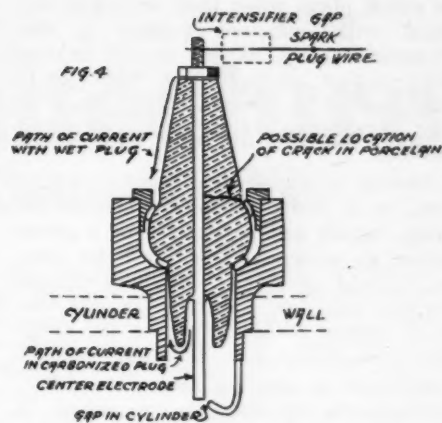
Showing typical spark plug construction and the possible places spark may jump when plug is defective
